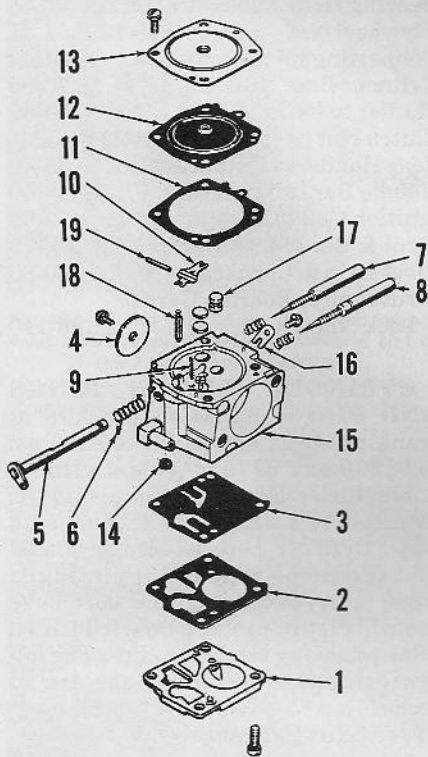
Exploded view of Tillotson HS carburetor.
